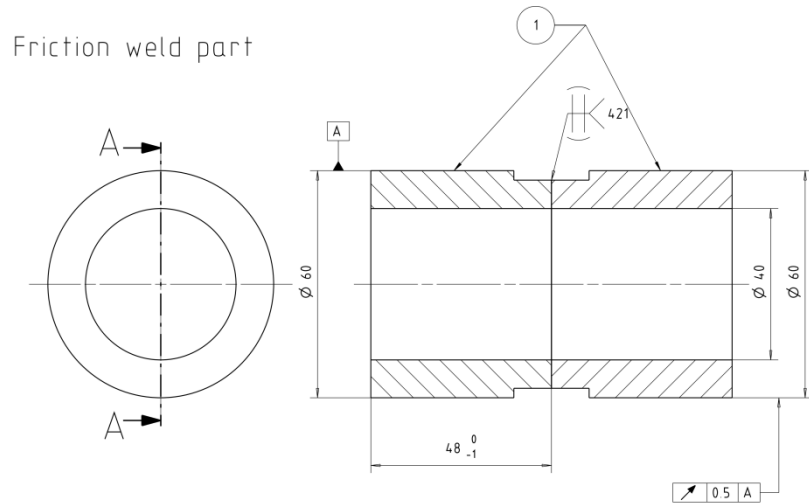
TZM weld specimen, contact area adapted to the available machine capacity
